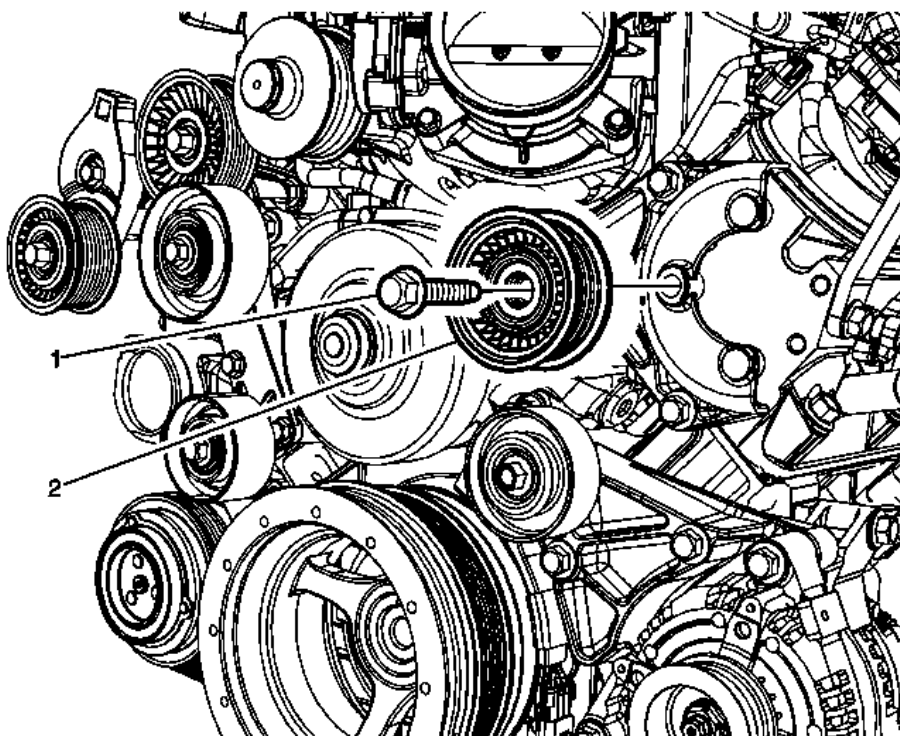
Drive Belt Idler Pulley & Fastener (LSA Upper)
